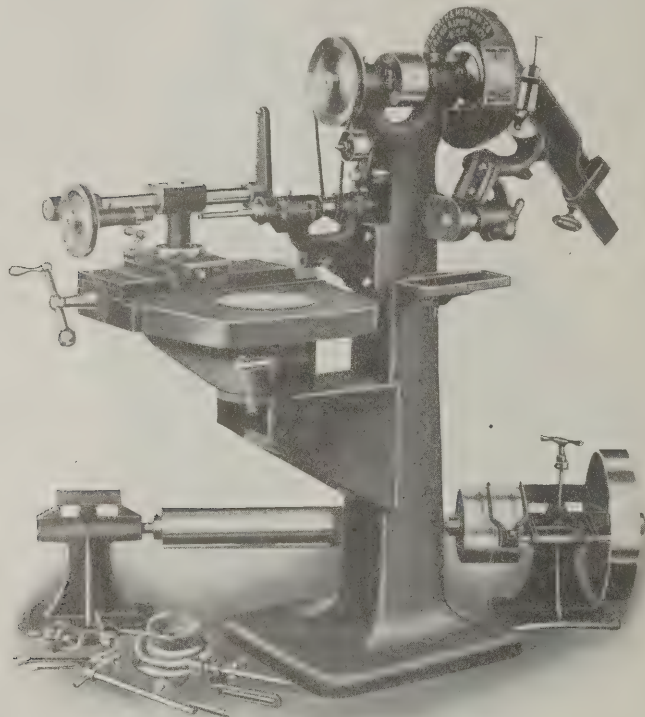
"Yankee" Cutter, Reamer and Drill Grinder with Cylindrical and Internal Grinding Attachment
